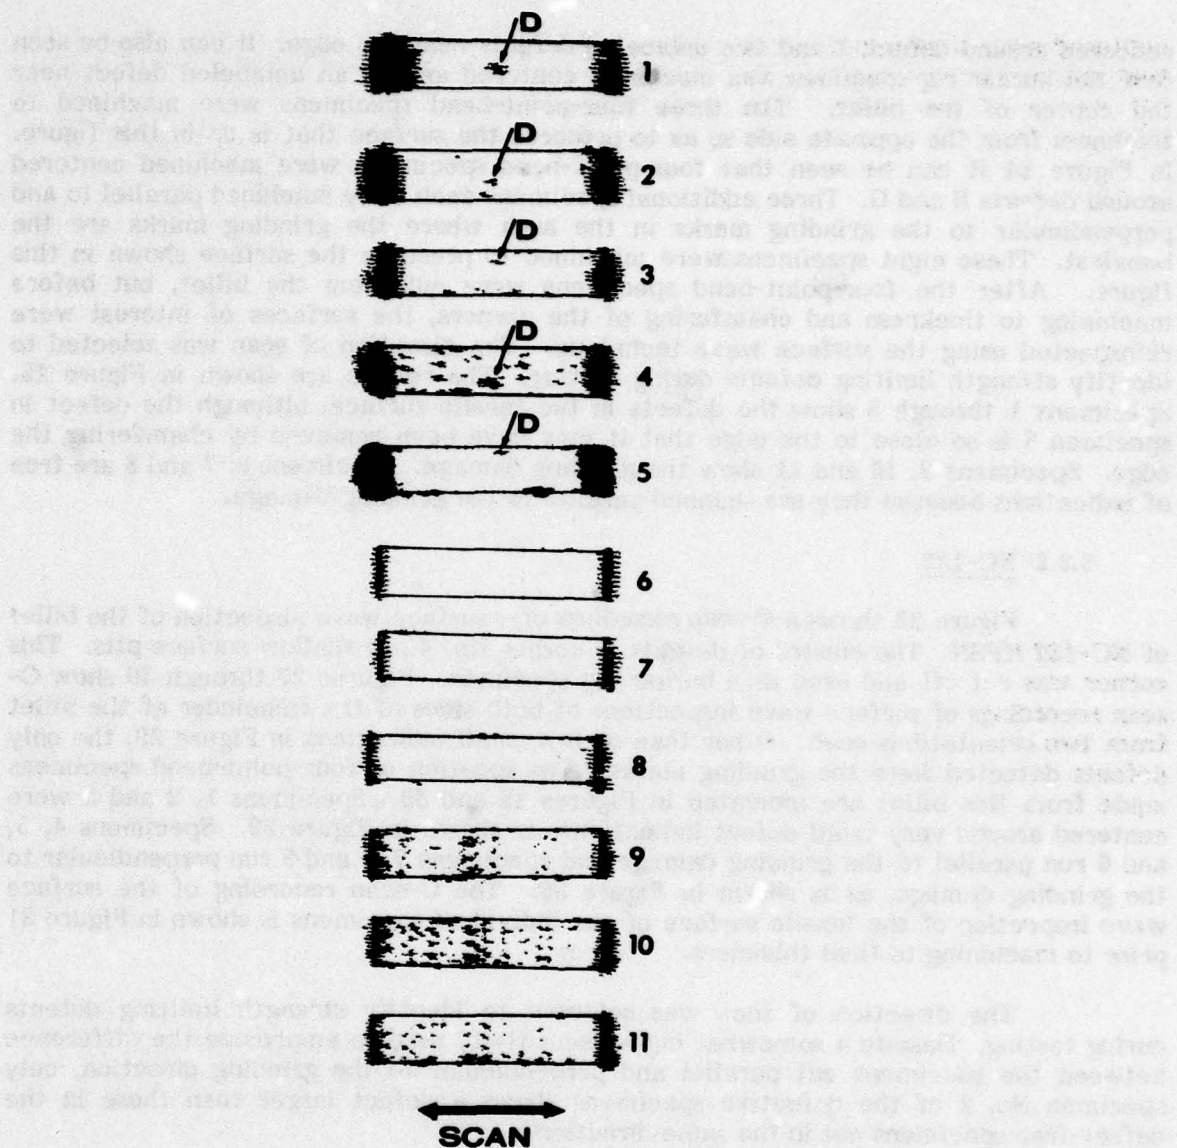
C-scan Recording of 45 MHz, 18° Surface Wave Inspection of Tensile Surfaces of Ceralloy 147A HPSN Four-Point-Bend Specimens.
